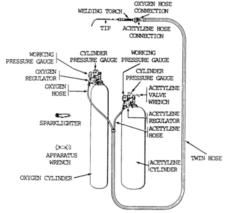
Portable oxyacetylene welding and cutting equipment.
